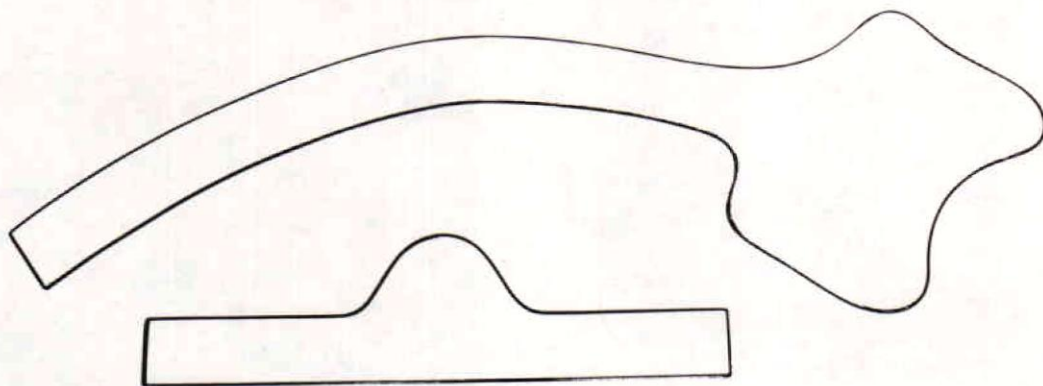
Shape of SADUR parts needed for the hemispiral AFO.
